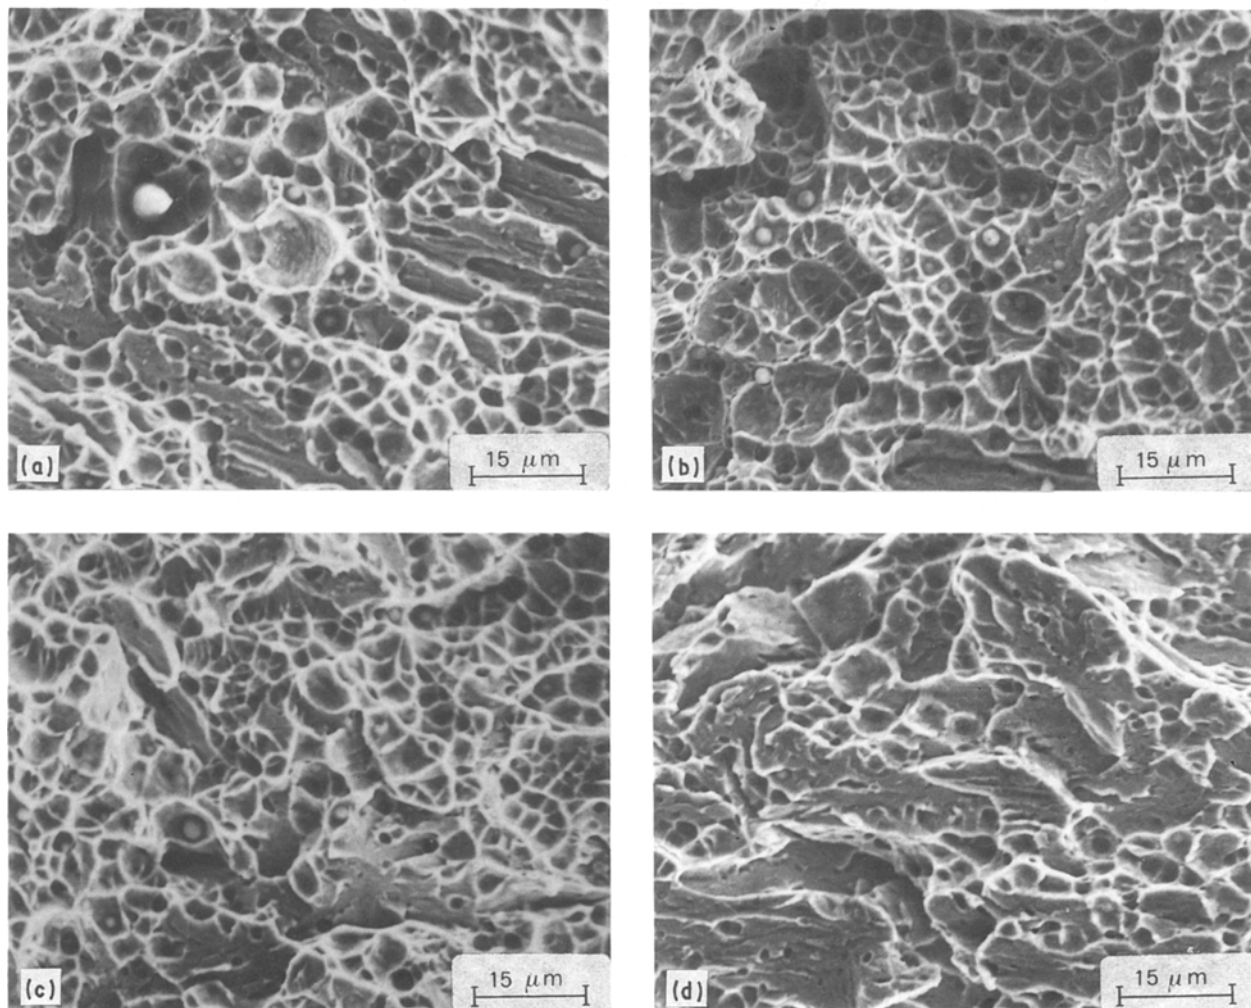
Fractographs of impact fracture surfaces of deposit 2: (a) as-deposited, (b) postheated at 350°C, (c) postheated at 450°C, (d) postheated at 550°C.
